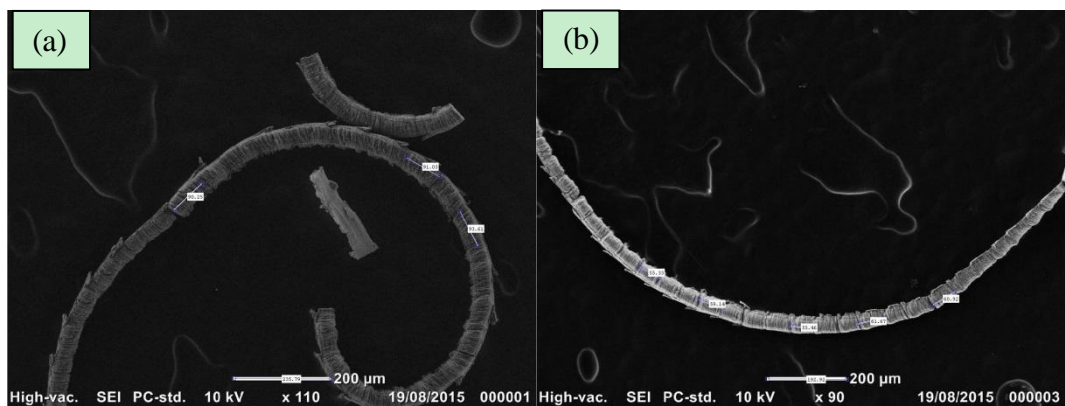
Chips formed at varied cutting speed (a) 12,000rpm (b) 30,000rpm
